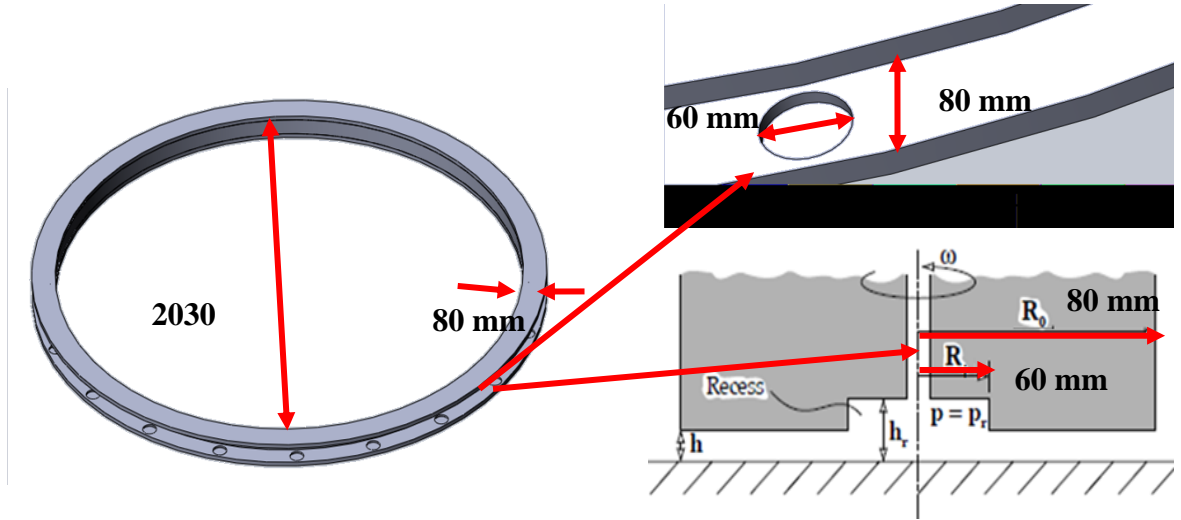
Inner ring of the hydrostatic yaw bearing
